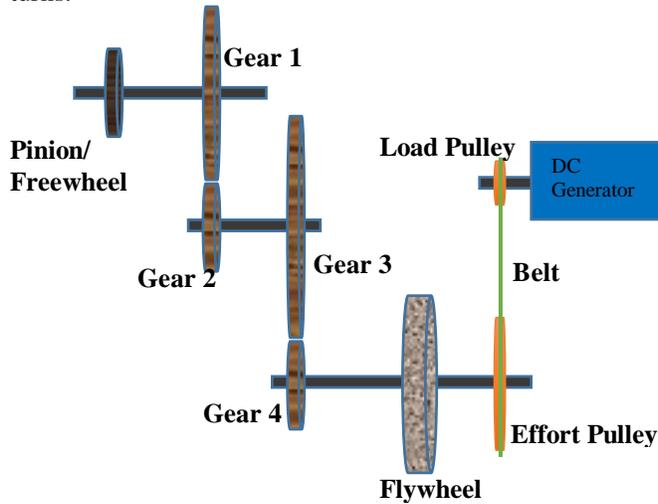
The gear system showing the arrangement of the pinion/freewheel, gears, flywheel, pulley belt, and the DC generator
